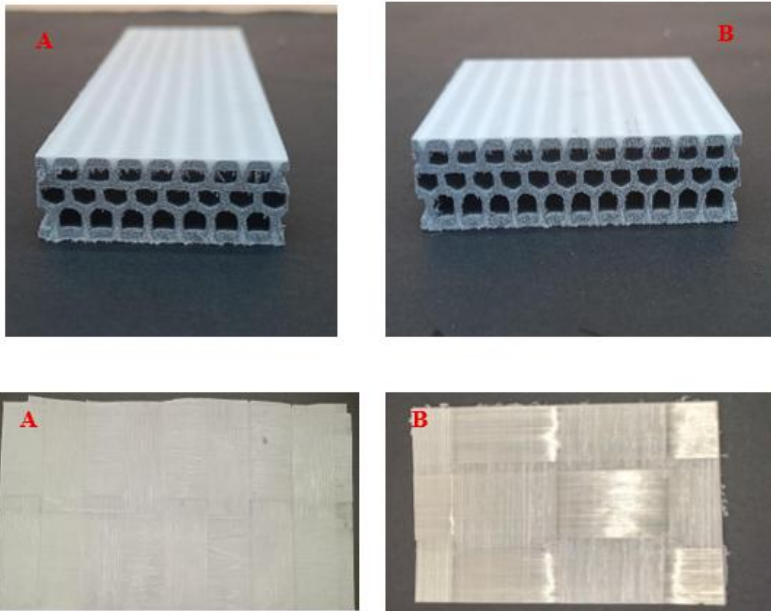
A) 3 Point-Bending specimen after cutting B) Penetration specimen after cutting.
